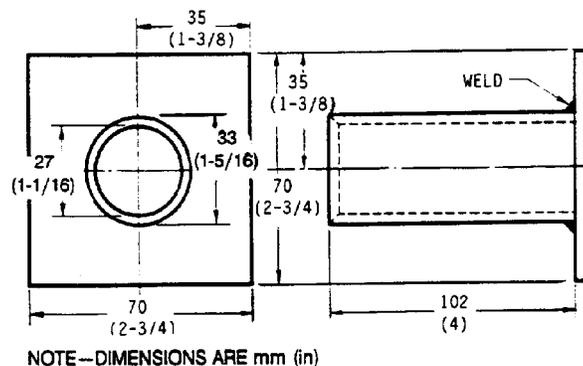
SPECIMEN PROTECTING FIXTURE TO BE CONSTRUCTED OF HEAT-RESISTING ALLOY
